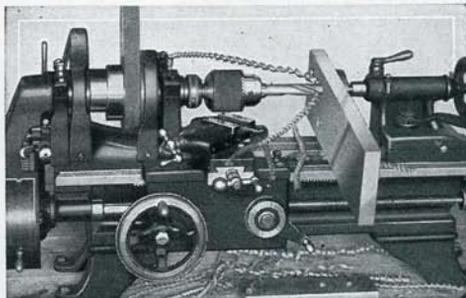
Drilling a Piece of Flat Steel Held Against Drill Pad in Tailstock
